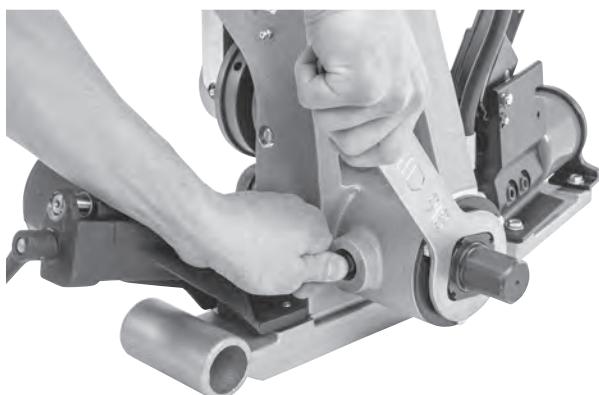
Engaging Spindle Lock and Removing Drive Shaft Retaining Nut
